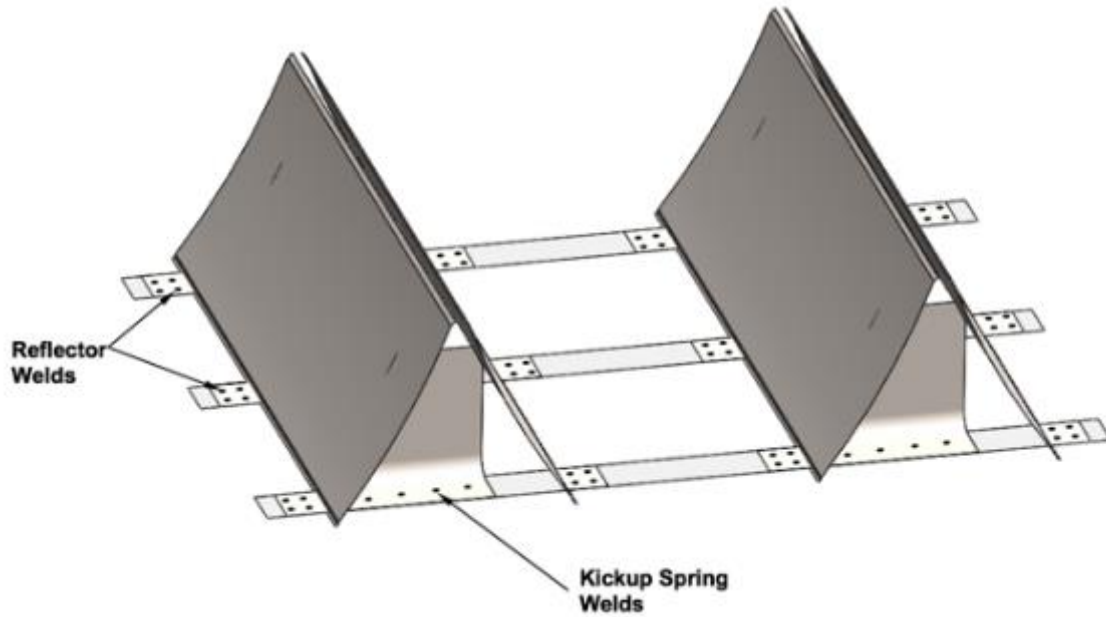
Titanium Welds within the Reflector Assembly
